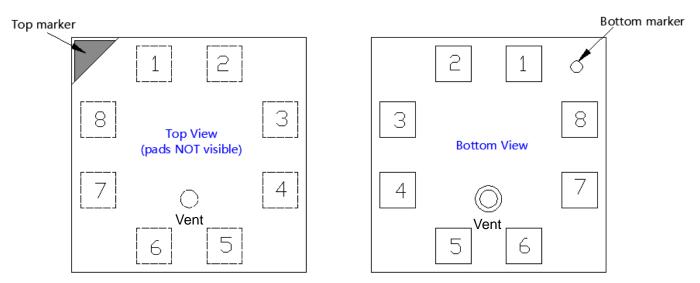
Layout pin configuration SPL17-002 (top view and bottom view)
